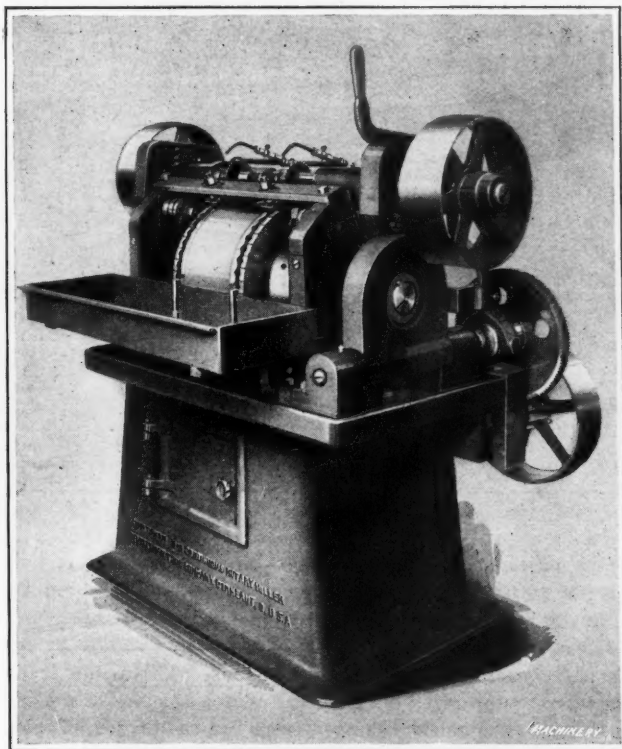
A Larger and Heavier Design of Continuous Rotary Milling Machine
